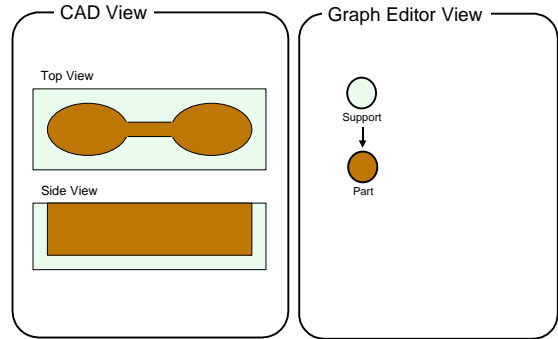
Design and graph at end of step 3: part material and shaped support material form a simple assembly in the CAD window and a two-node graph in the process window
